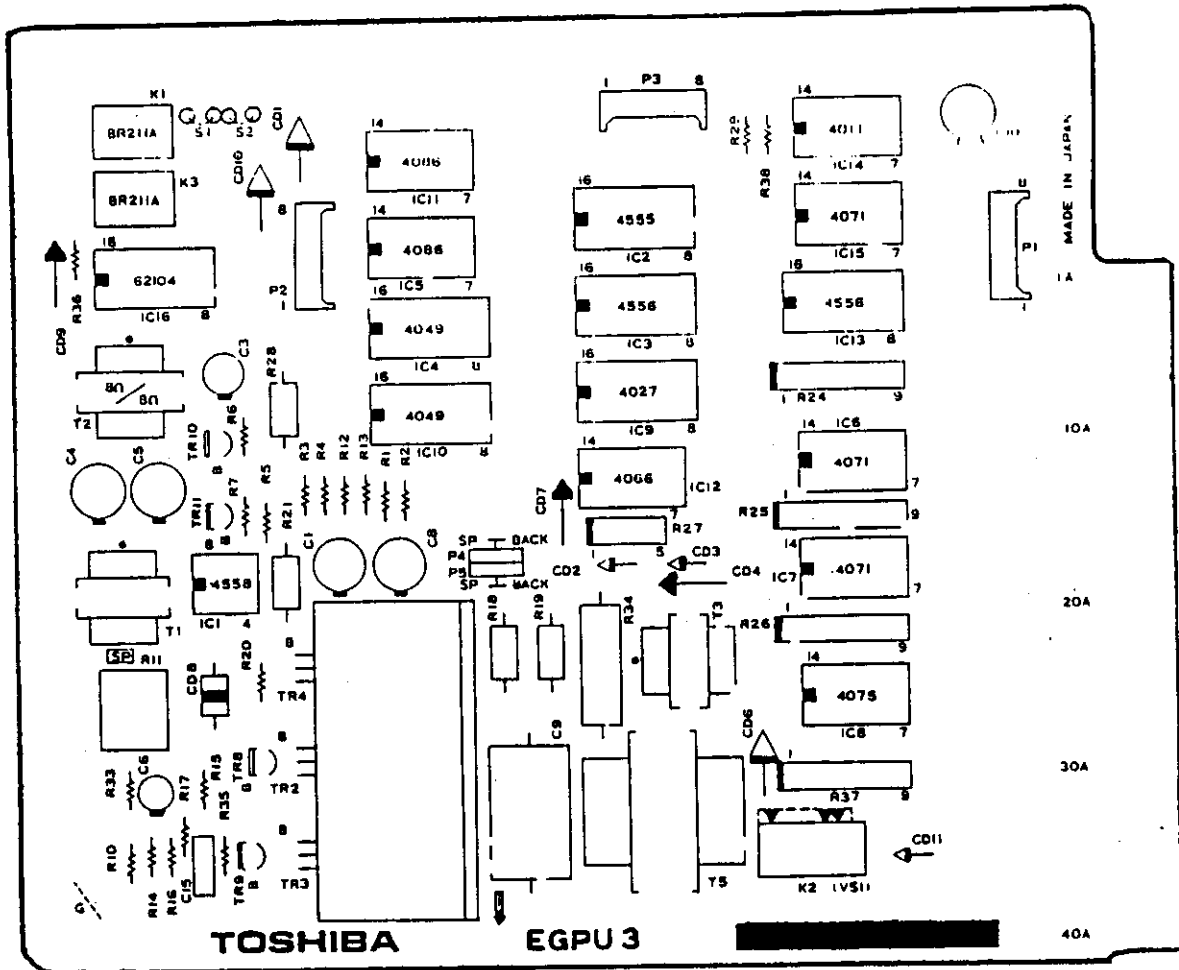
EGPU-3 PCB - PHYSICAL LAYOUT
